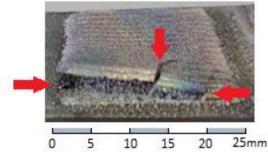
Samples with deposition on AISI H-13 substrate with cracks and spalling
